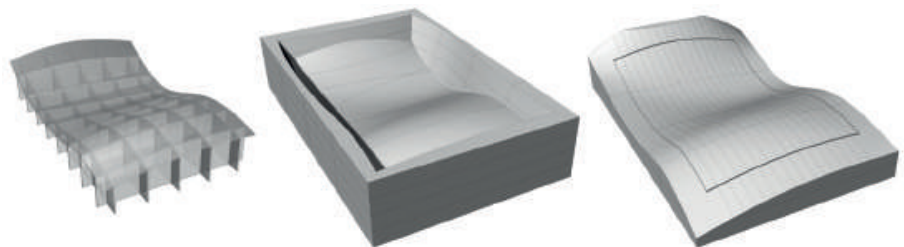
Different open molds automatically prepared by the algorithm for the same input geometry: cutting and assembly of sheet material (left), milling in EPS (center) and hot-wire material removal (right).
